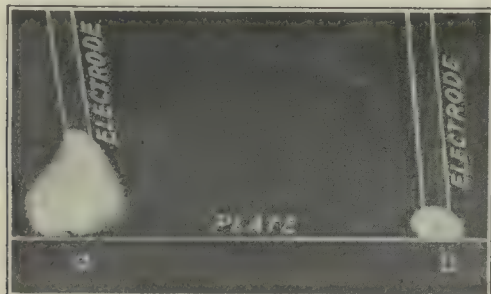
LONG AND SHORT WELDING ARC
